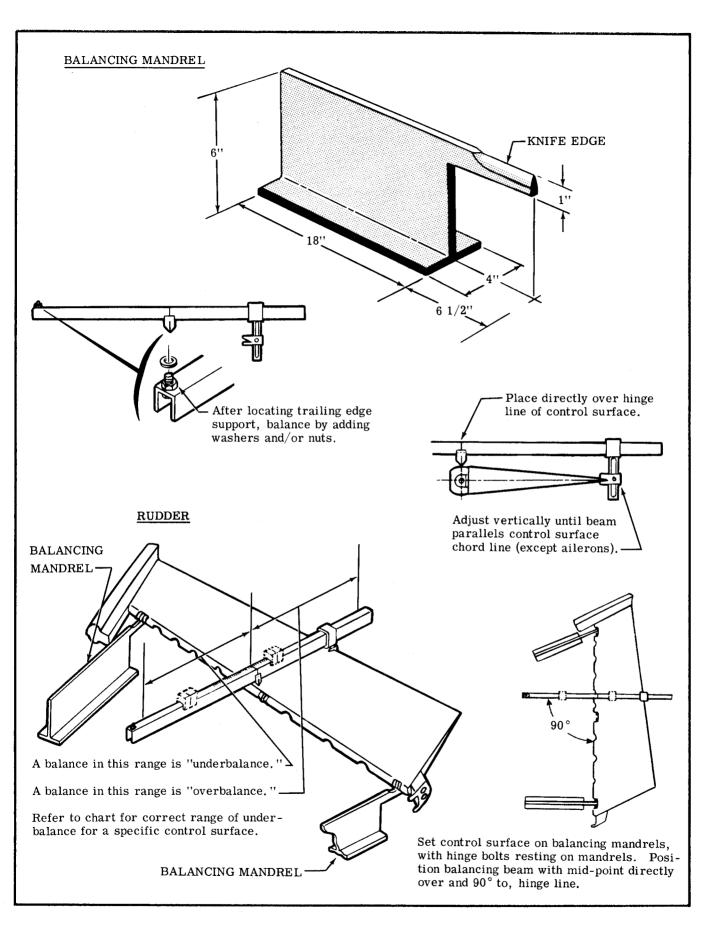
Control Surface Balancing (Sheet 2 of 4)
